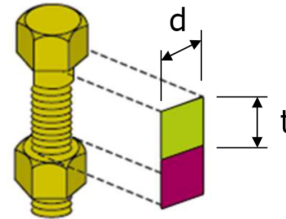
Dimensions relevant to bearing failure.
